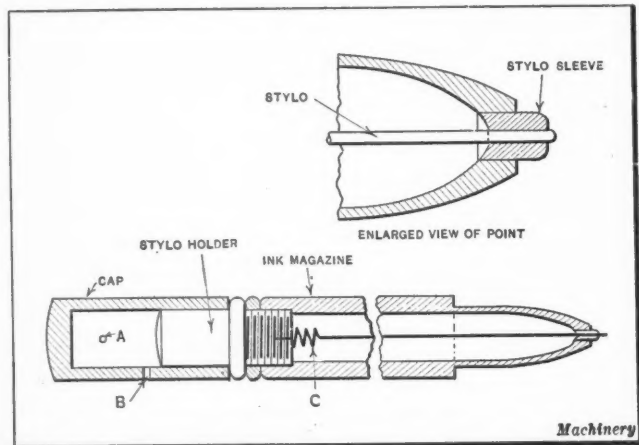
Sectional View of Fountain Pen and an Enlarged View of Point lapped by Machine shown in Fig. 2
